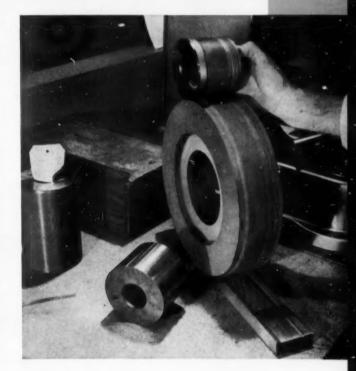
(above) Wheel formed by crush roll is used to grind close tolerance shape on thread roll die.
